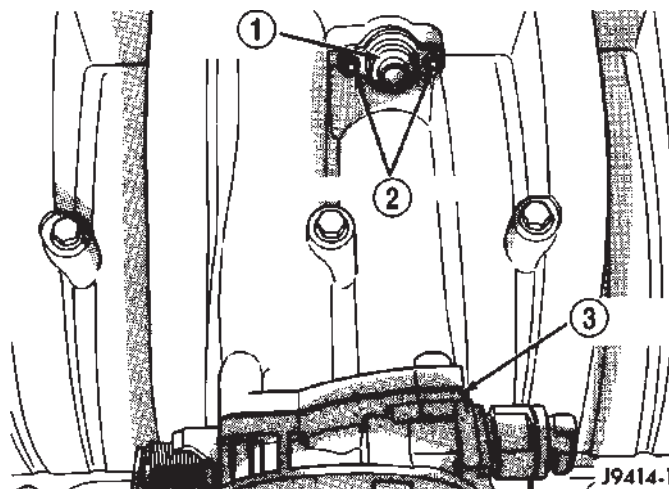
MAP Sensor Location—8.0L V-10 Engine—Typical
